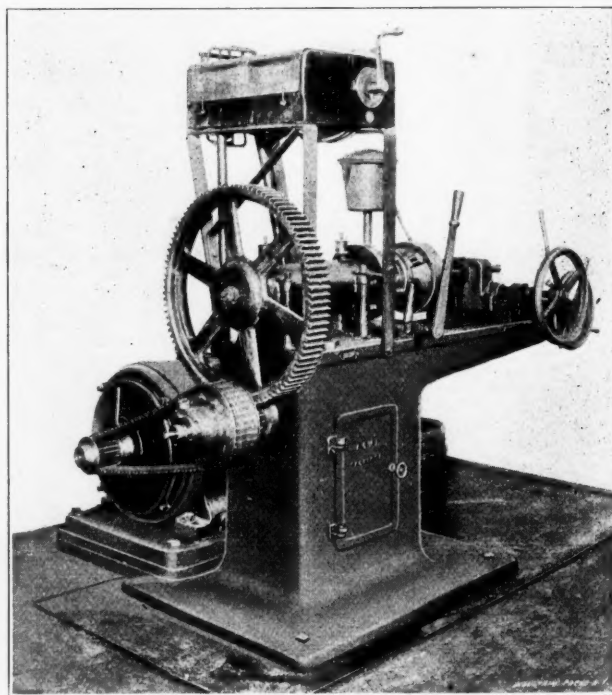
Acme Bolt Cutter, Motor Driven, Renold Chain Drive.
